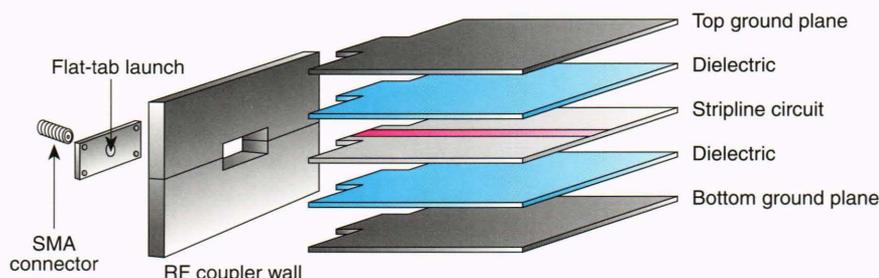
Using a flat-tab launch and subminiature (SMA) connector to connect coaxial cable to a stripline. The launch can be either soldered or press fit to the stripline.
